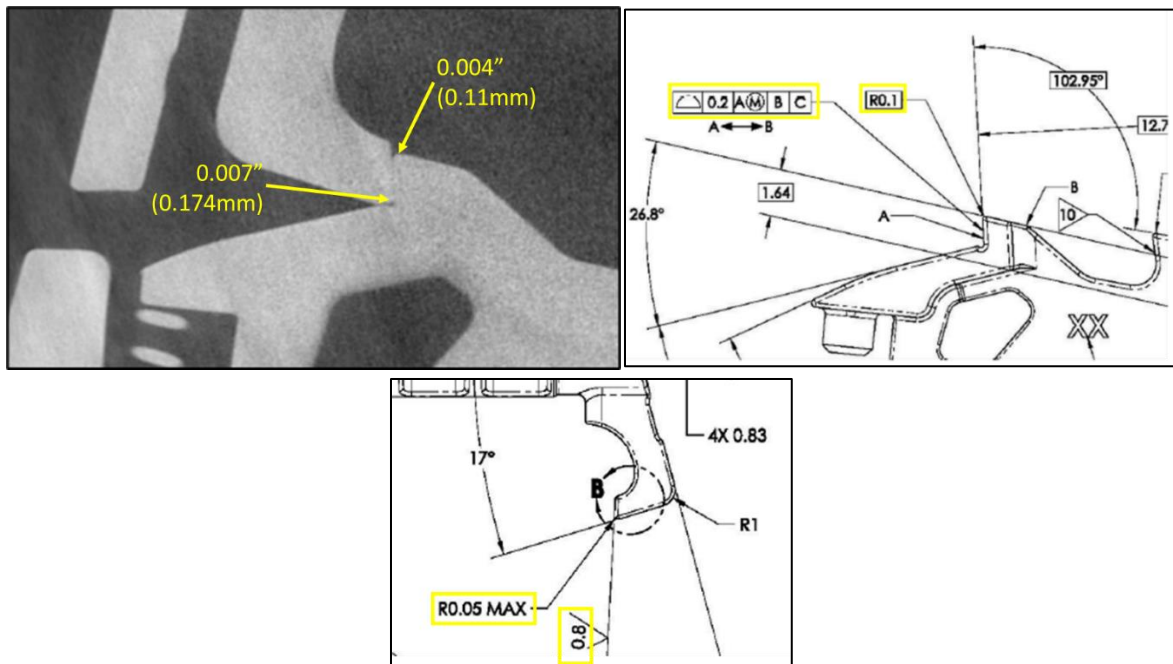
CT scan of the subject striker and sear (top left), sear drawing (top right), and striker drawing (bottom)
